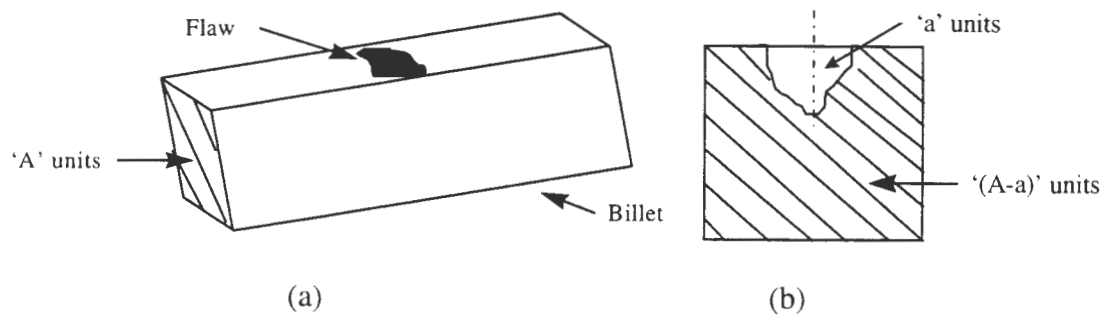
(a) Billet with defect (b) Cross-section through flaw [5].
